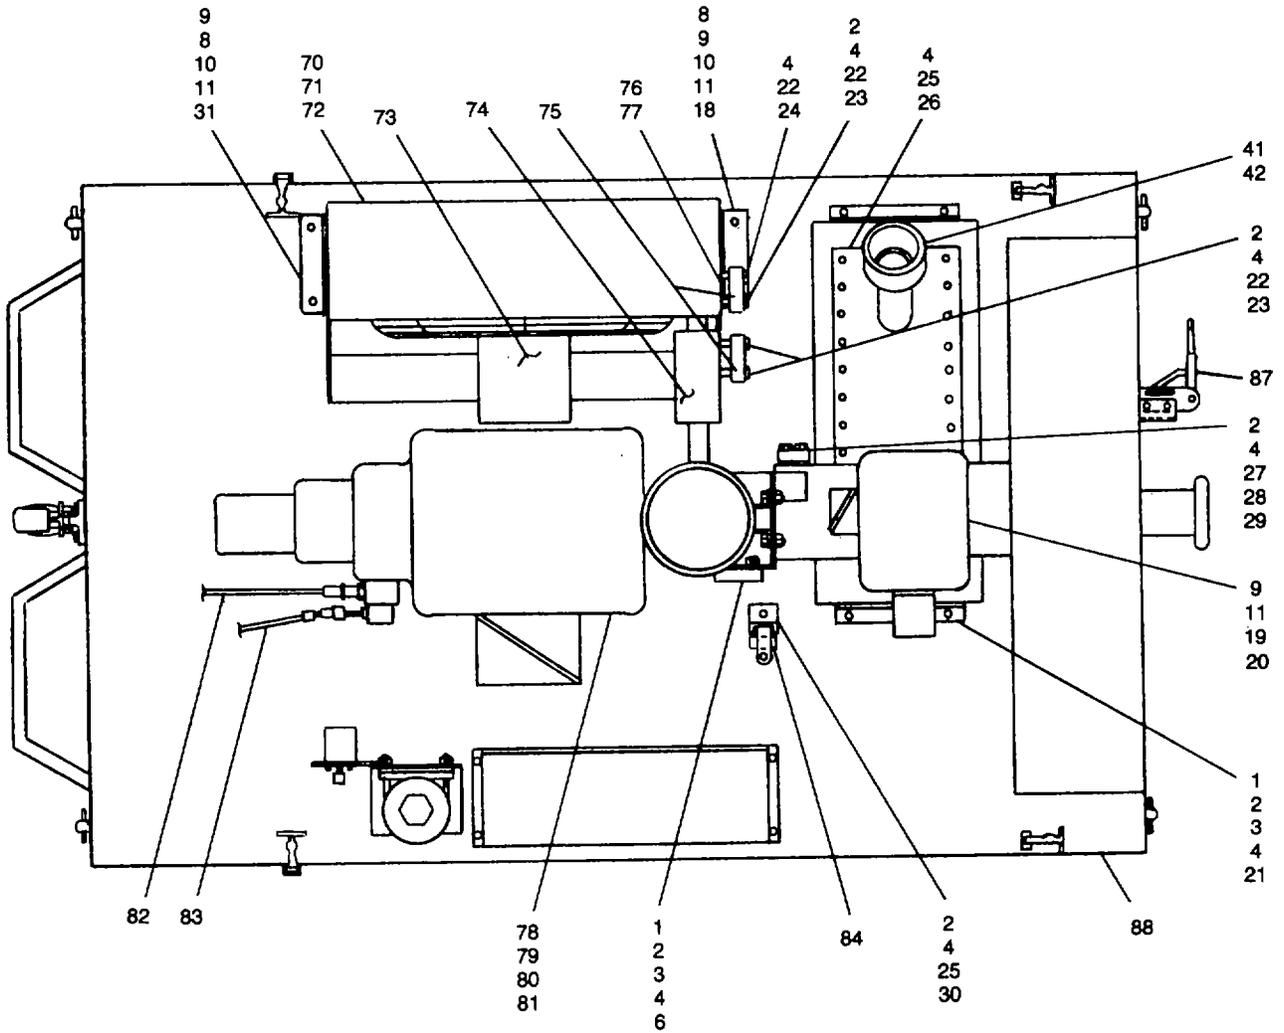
INTERNAL COMPONENTS ASSEMBLY
